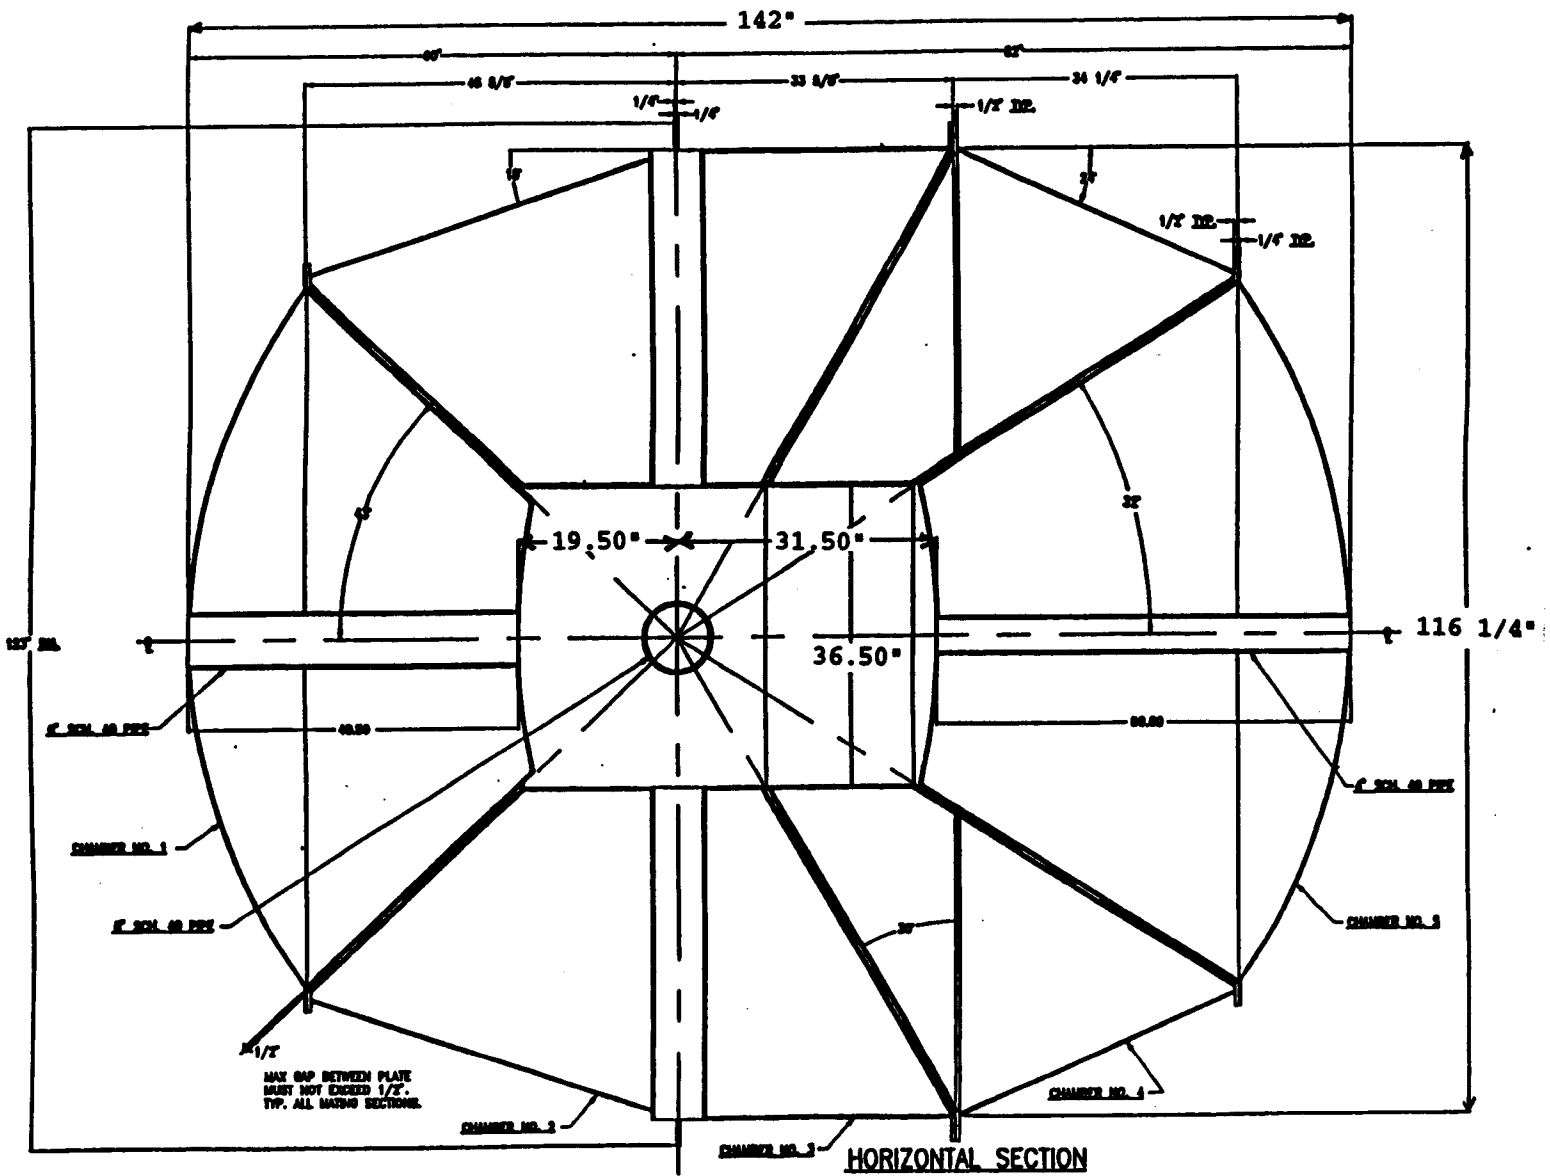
SuperBall* engineering drawing of a horizontal cross sectional view of docked tank assembly.
